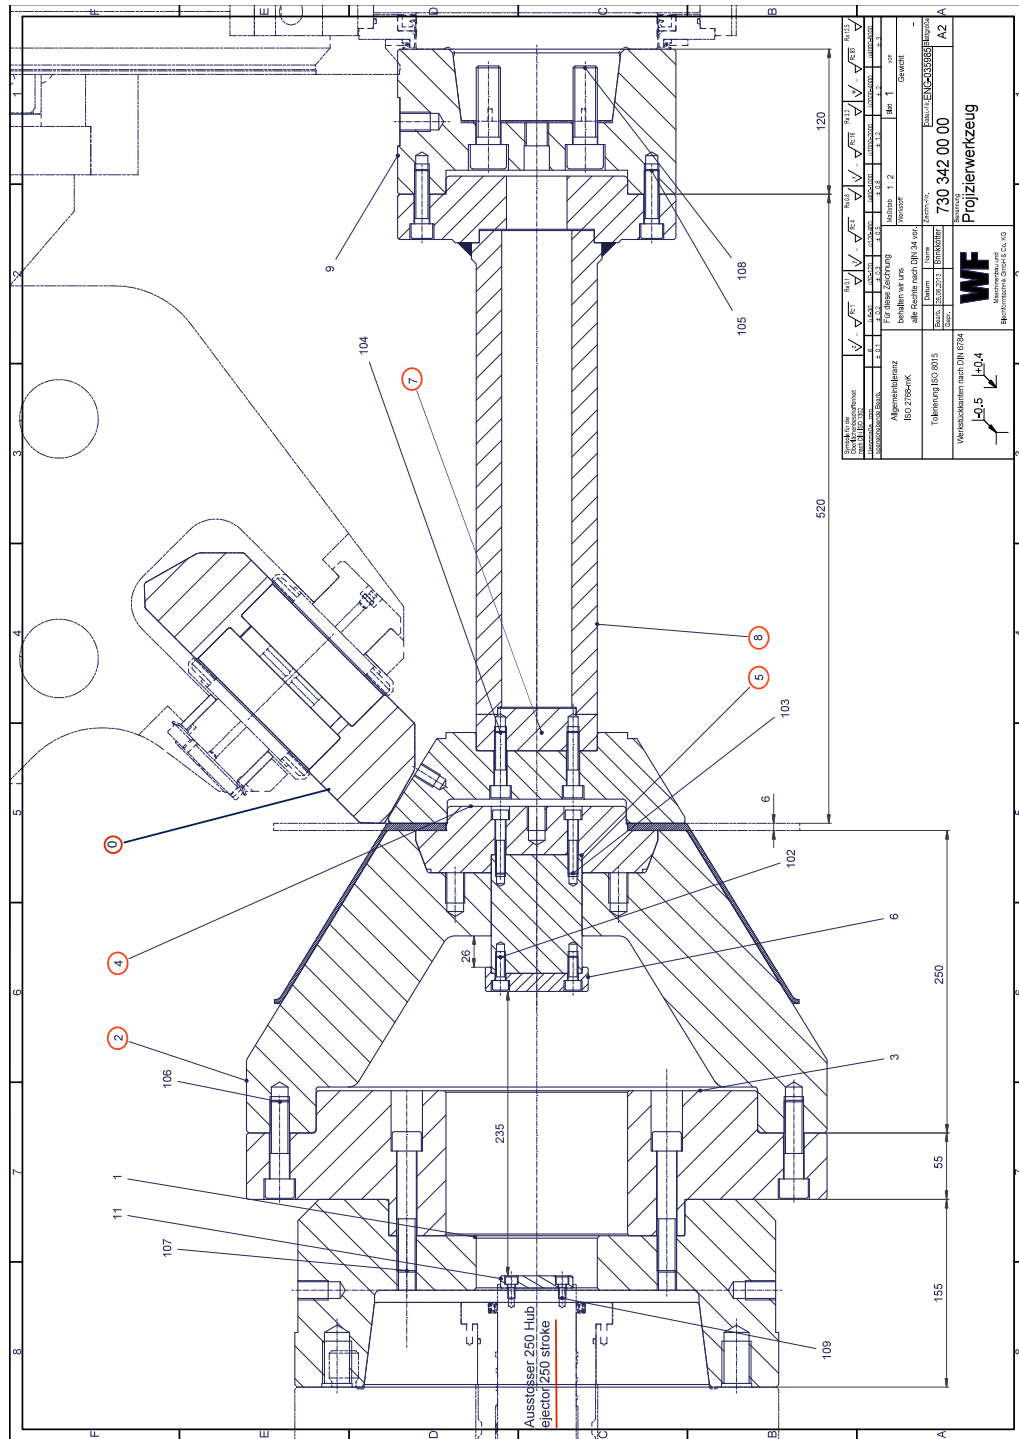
Assembly drawing of the 31.5° geometry – 730 342 00 00 “Projizierwerkzeug”.
